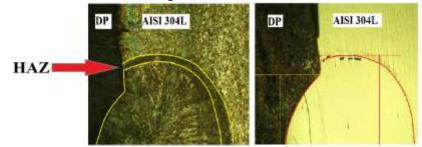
(a) Heat Affected Zone in dissimilar spot welding Fig.7(b) Nugget size in dissimilar spot welding
